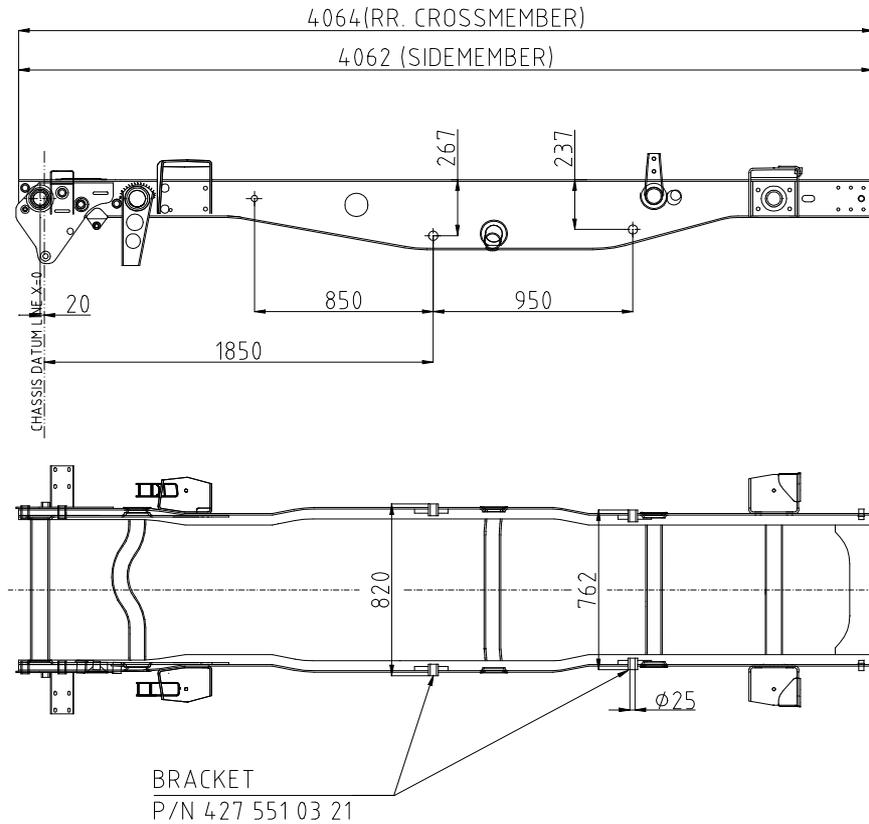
Center implement points, frame U130, BM 418.102 (code D60, 4 mounting supports 427 551 03 21)
